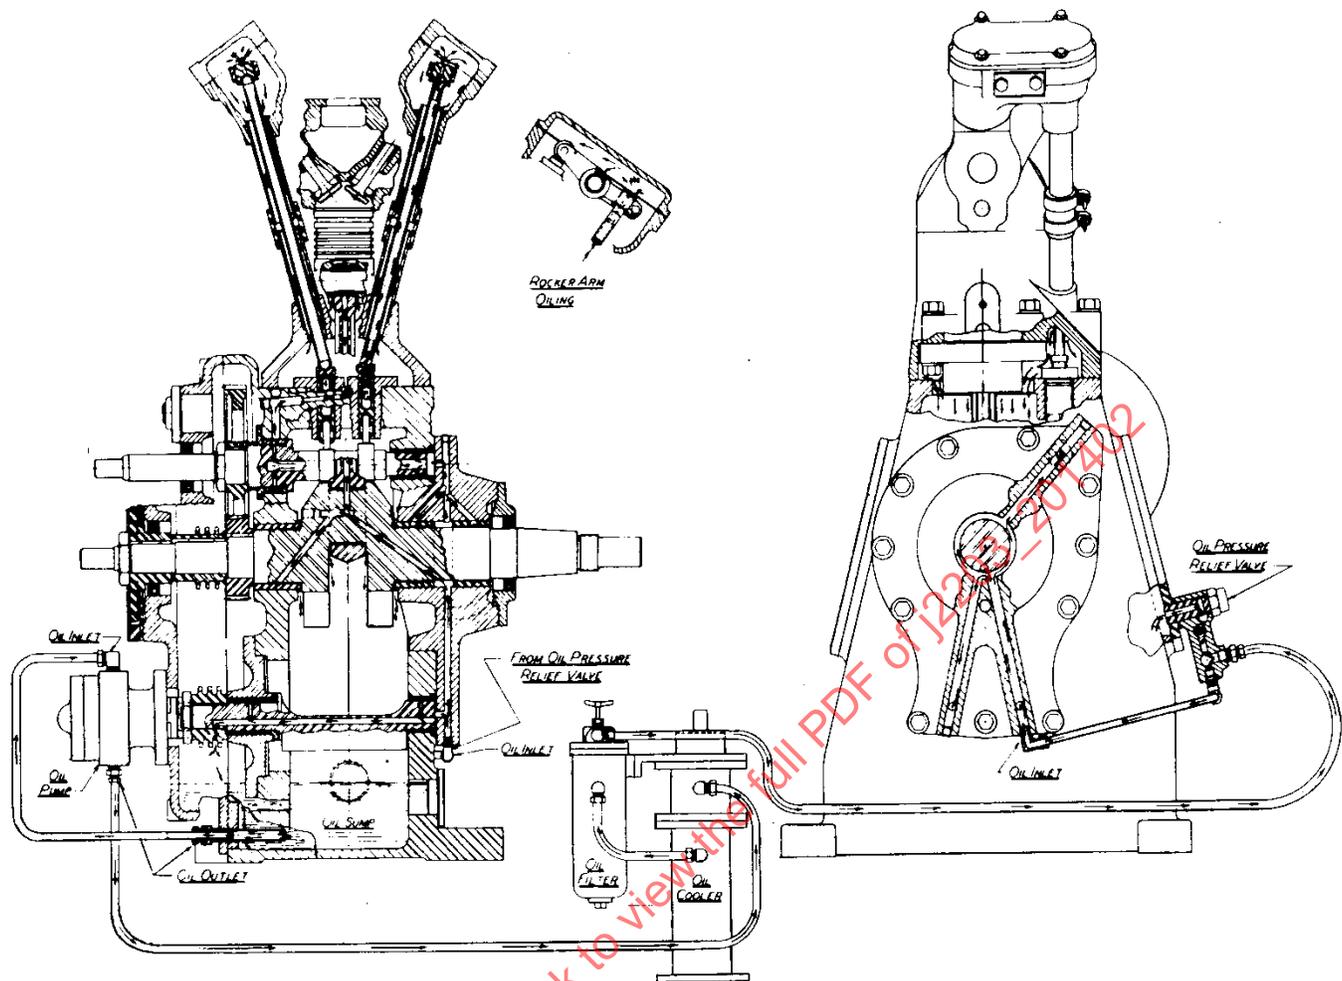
#5750 / 16047 ENGINE LUBRICATION SYSTEM
